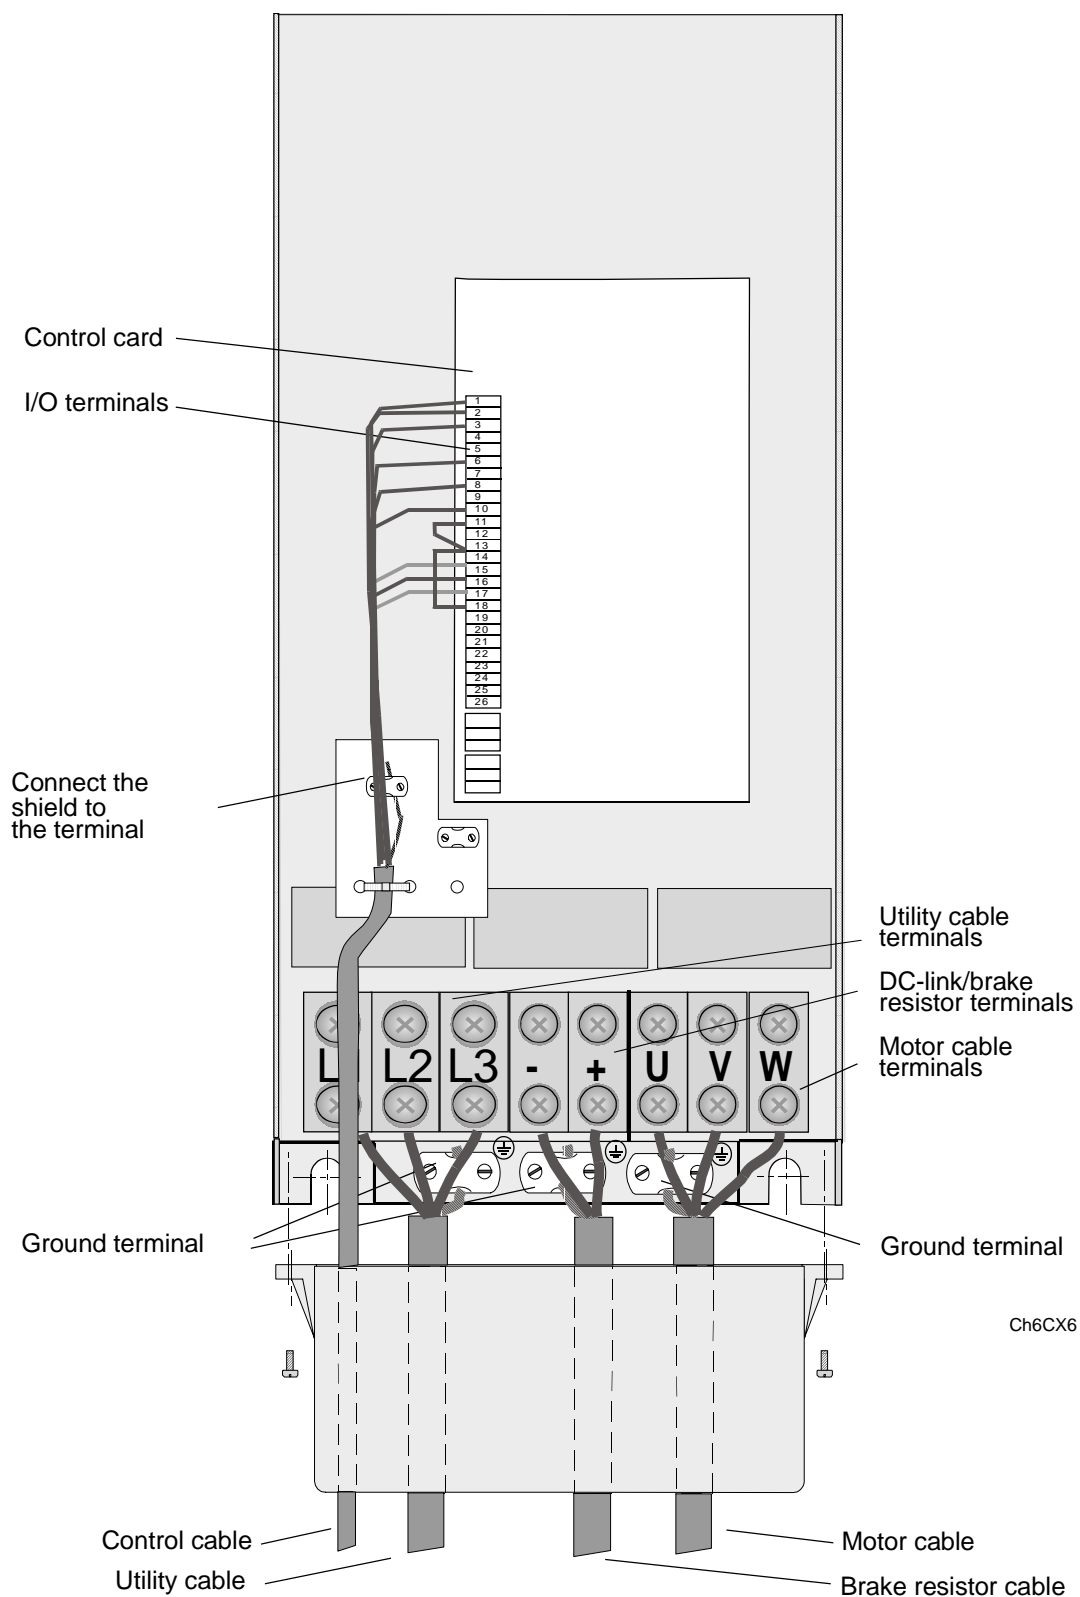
Cable assembly for open chassis: CX 0400-1000HP V 3 6.
